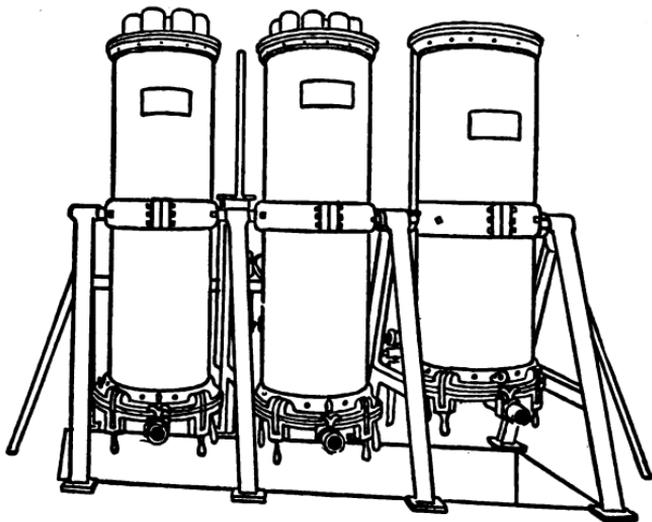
Modern Roller Casting Apparatus in perpendicular position. The steel tubes within the large cylinders are protected from atmospheric action during the process of casting. The outer cylinder is filled with hot water which surrounds the roller molds within and heats them to the temperature of the composition, which is then forced into the bottom of the tubes under pressure, flowing upward to the desired height. After the casting is completed cold water is substituted for hot until the cast is cold, when the bottom plate is removed and the rollers descend by their own weight to the floor below. See Fig. 4.
